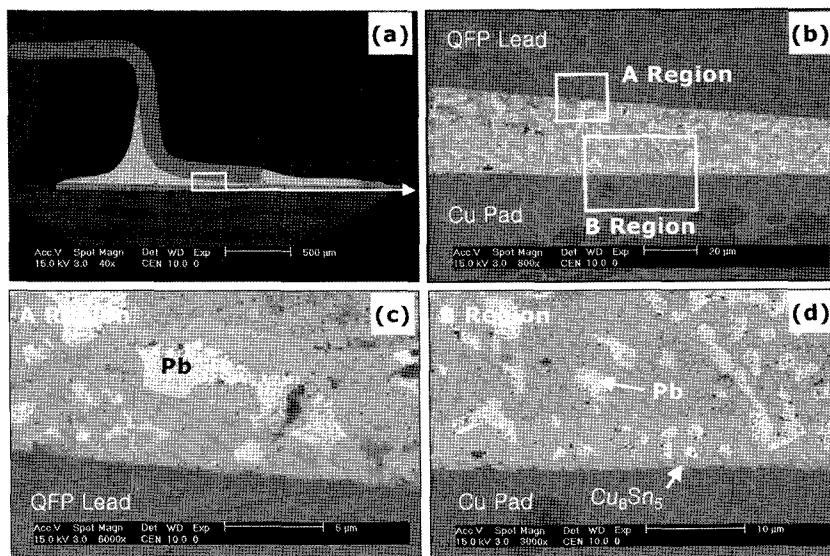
Cross section images of 44 pin QFP soldered with Sn-40 Pb after thermal shock test, 2,000 cycles: (a) overall shape of solder joint, (b) magnified view of solder joint, (c) microstructure of QFP lead side and (d) microstructure of Cu pad side.
